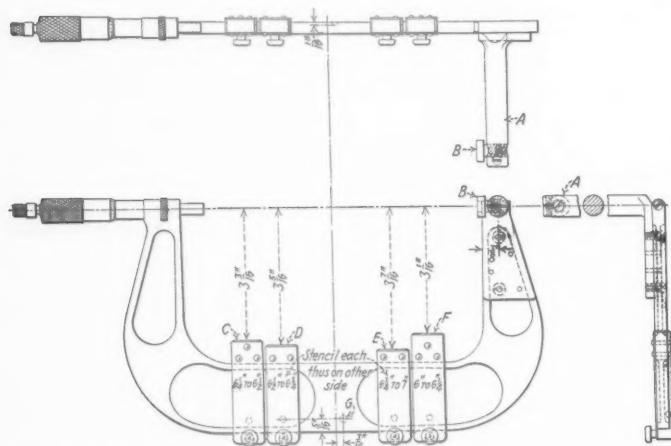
Micrometer Caliper with Special Attachment for Measuring Wheel Seats on Axles
